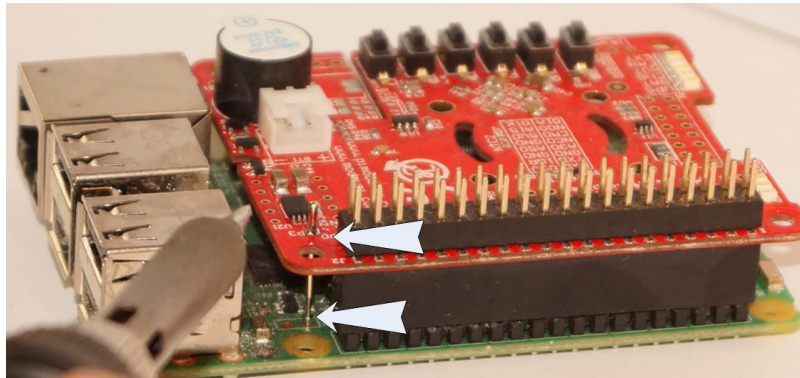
Soldered Gold-Plated Reset Pin is touching exactly the RUN pad
